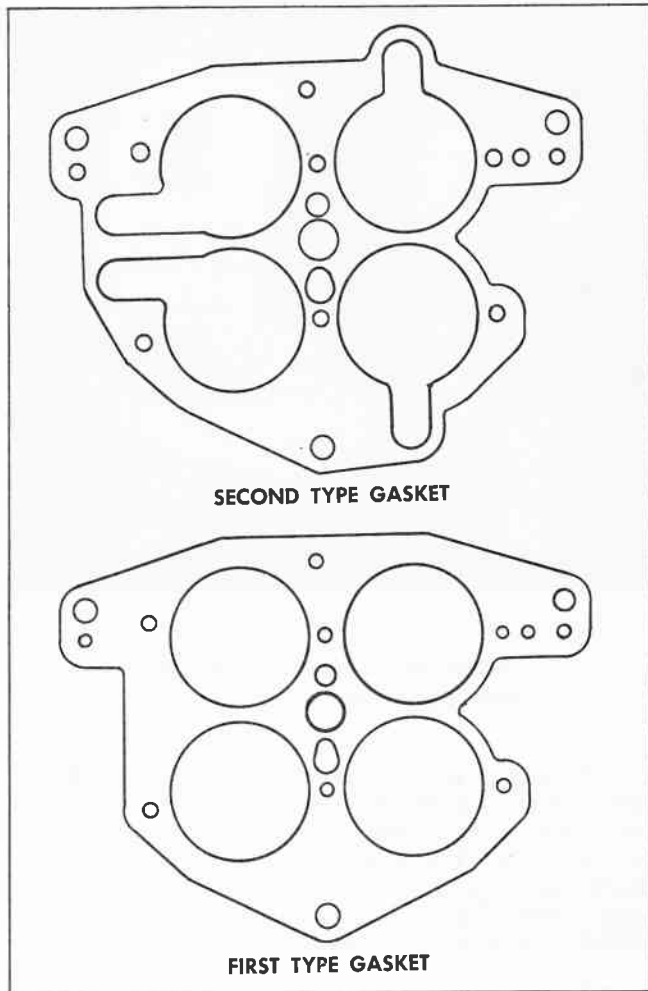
First and Second Type Throttle Body To Bowl Gasket
